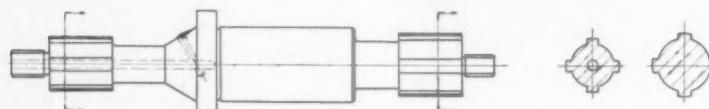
Splined shafts of this type are successfully machined on the Fellows type gear cutter, and as there are many occasions when alignment of the key is essential, a special setting is needed once the first keys have been machined
